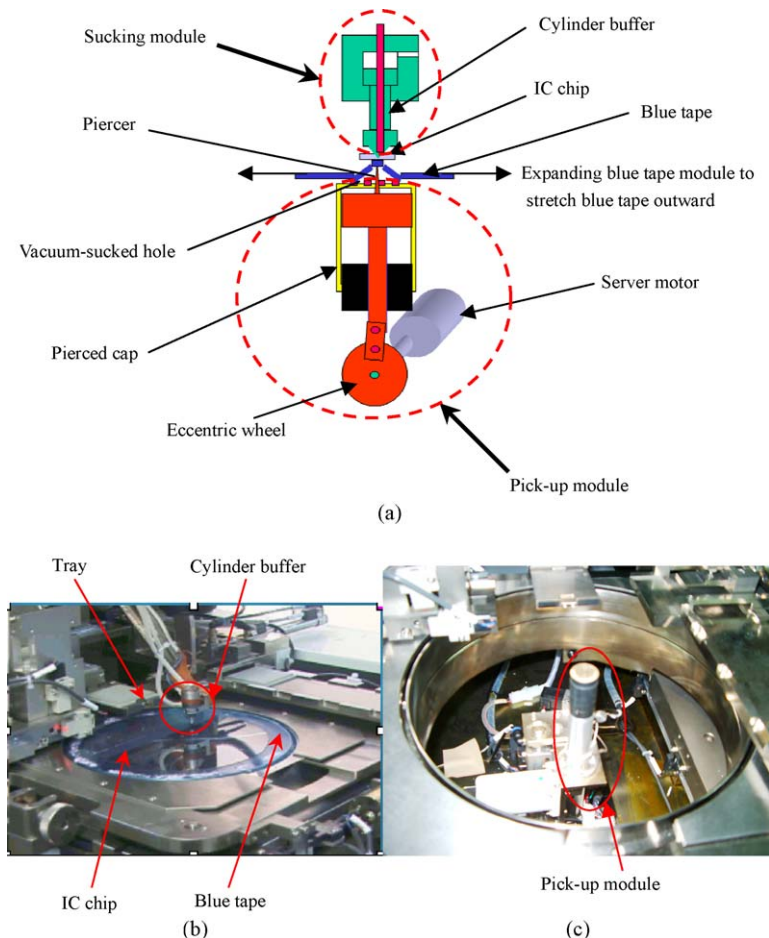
The pick-up IC chip machine, MIRL CP602. (a) The sketch diagram, (b) machine and (c) pick-up module.
